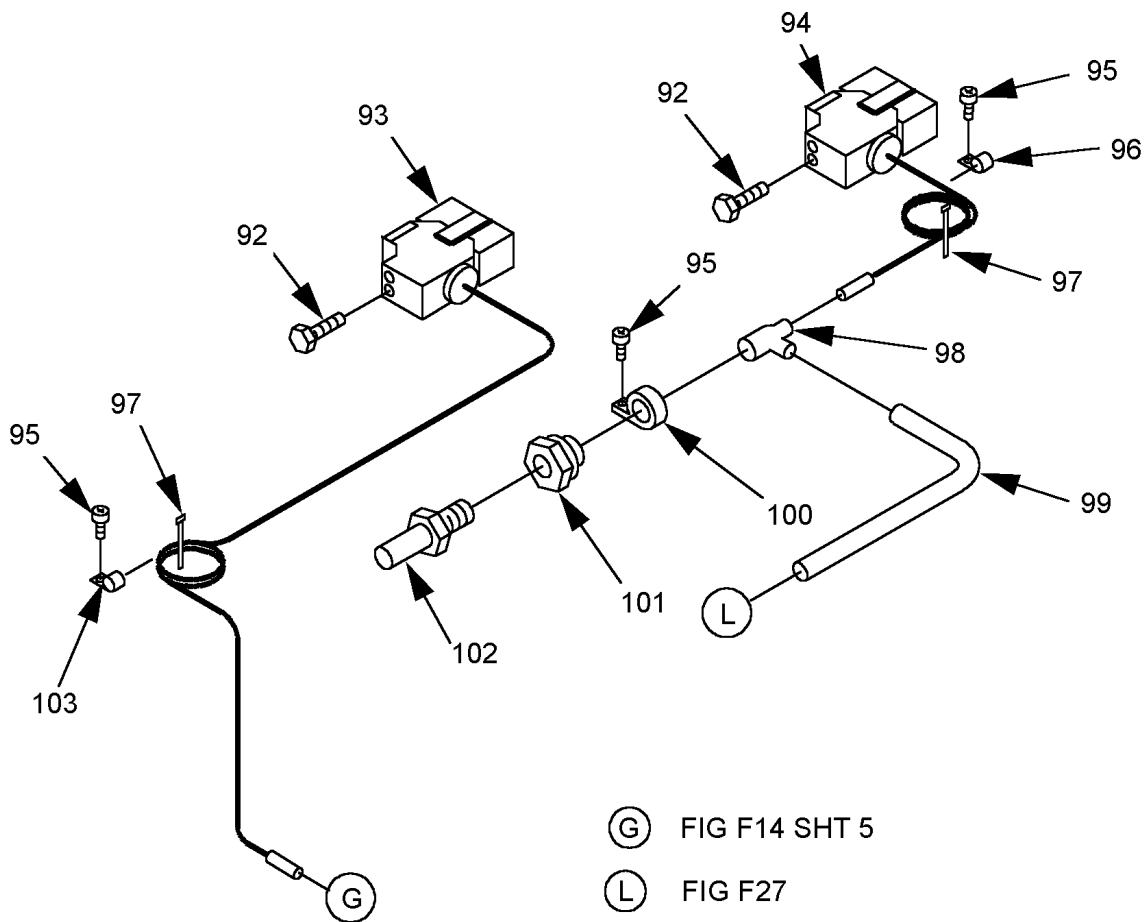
Condenser Assembly (Sheet 6 of 6)
